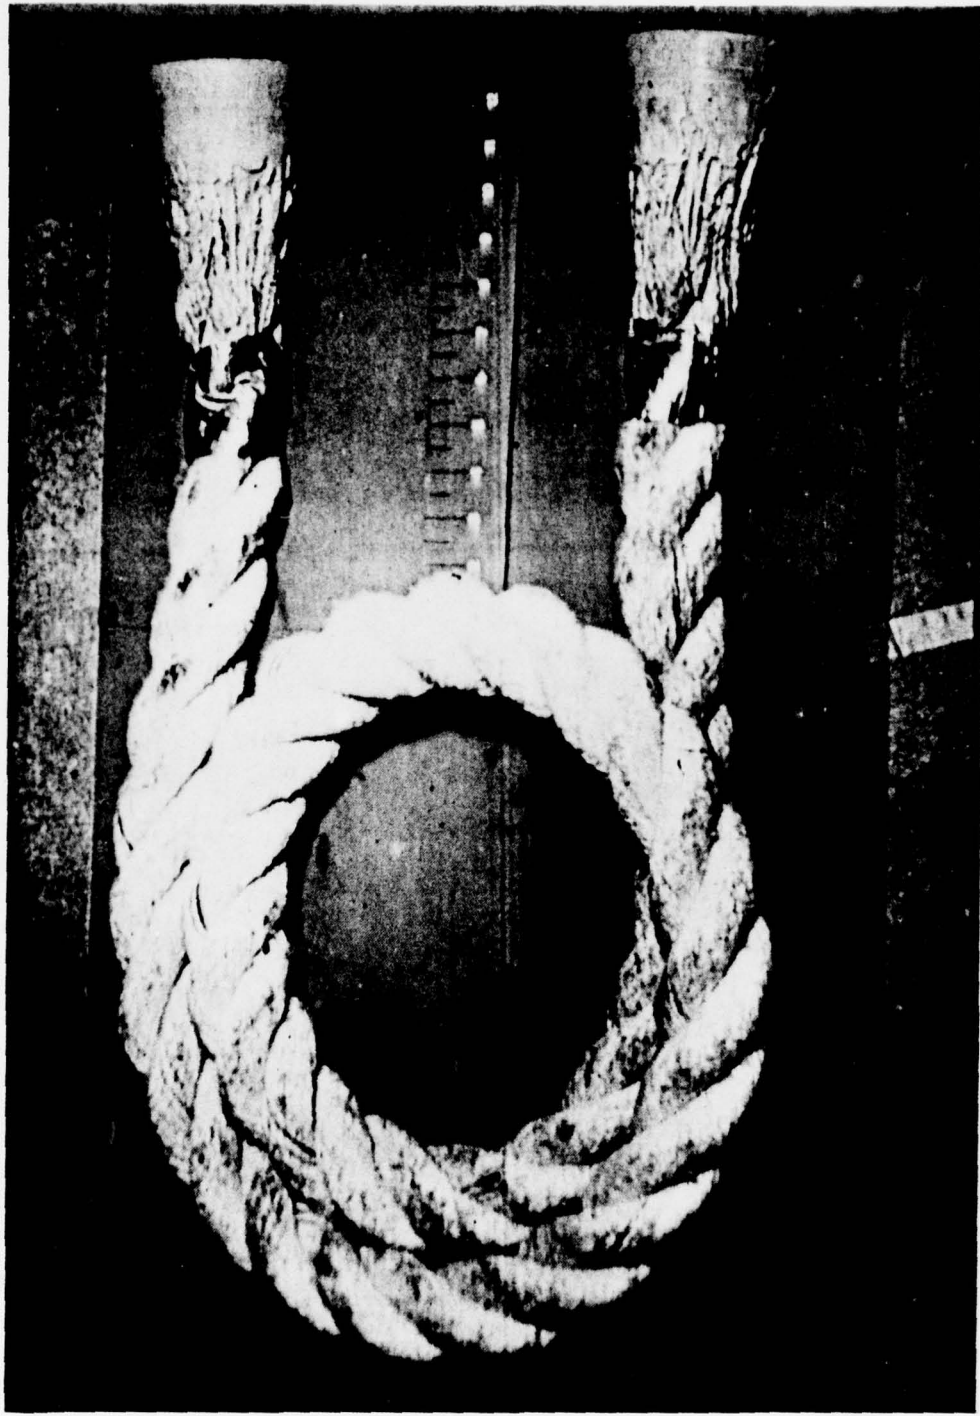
PHOTOGRAPHIC VIEW OF ROPE SECTION WITH EPOXY MOLD END FITTINGS
